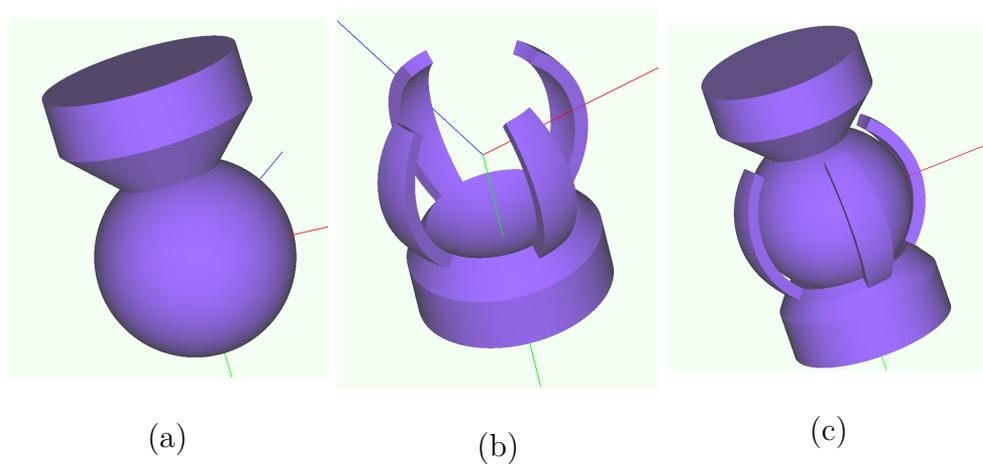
Ball-Socket joint: (a) top part, (b) bottom part, and (c) combined.
